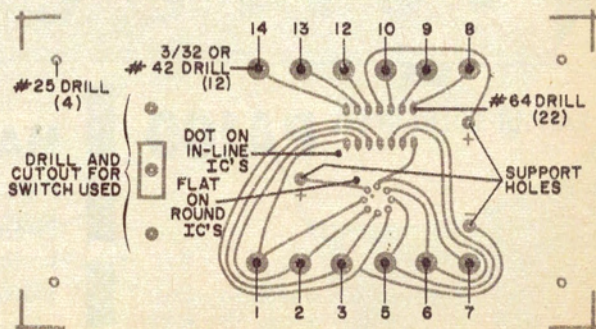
Parts layout for the socket-contact board. Note the three support holes for oscillator board.
